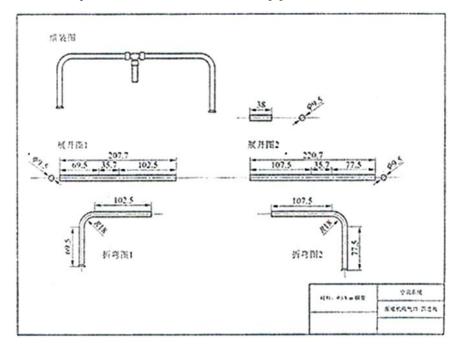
Dimensional drawing of air conditioner pipe 9
